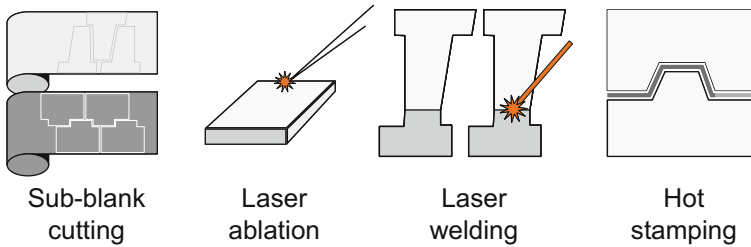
Tailor welded blanks (TWB) may better utilize material and save cost (re-created after [12, 13])
